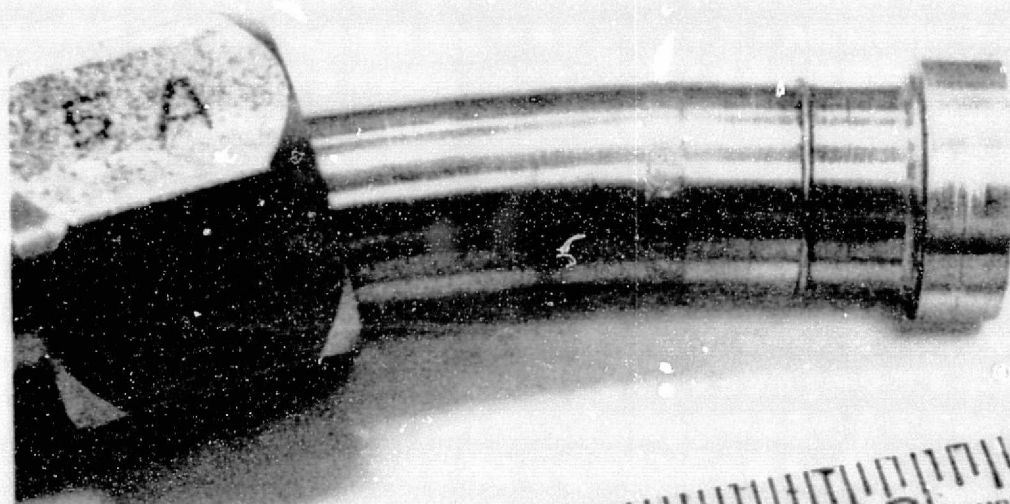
Close-up View of the Weld in 3/4 Inch Size Tubing
